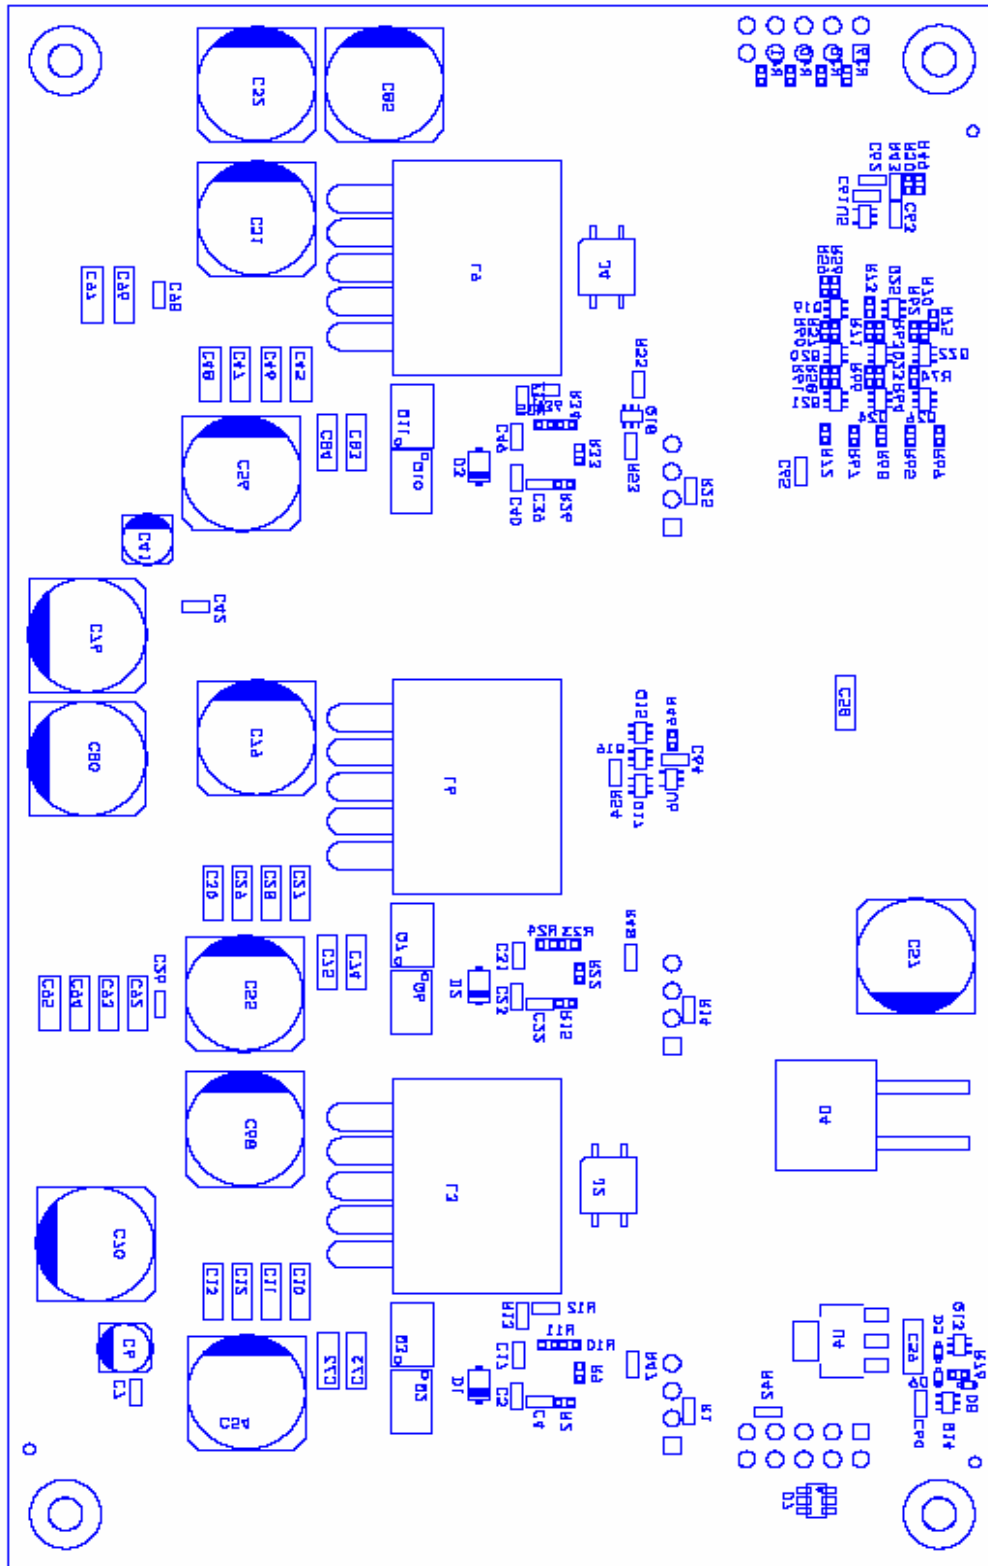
BOTTOM ASSEMBLY DRAWING
